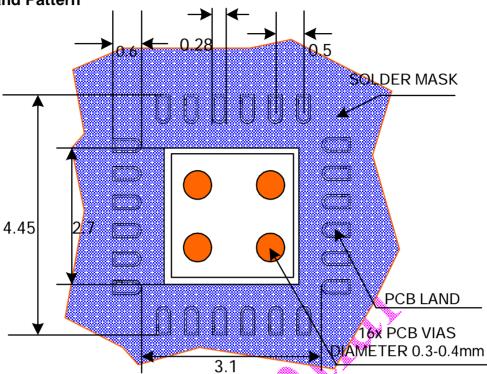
PCB Land Pattern for 24-Pin QFN
